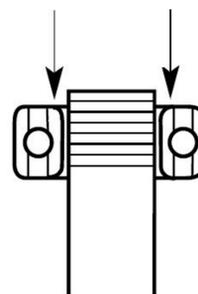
When installing a bearing onto a shaft, press only on the inner race.
